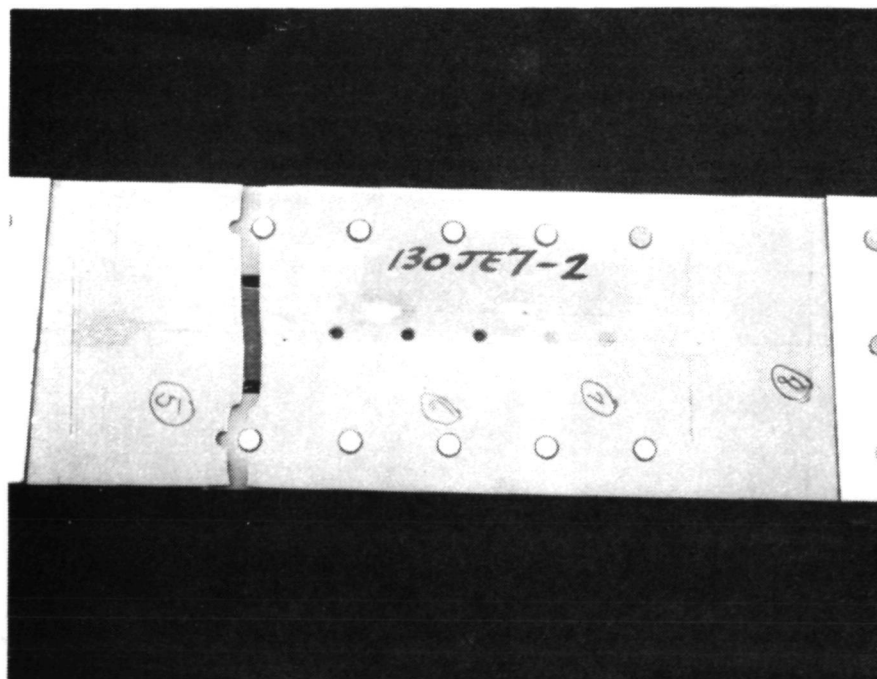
SKIN SIDE OF FAILED 130-JE-7-2 SPECIMEN
